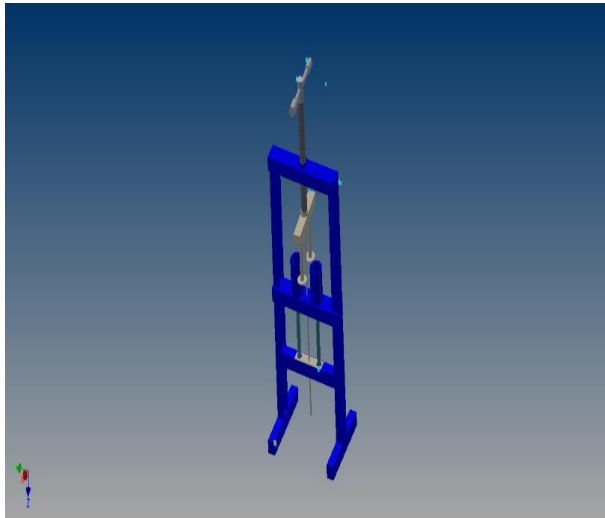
3-D view of the briquetting machine Plate 2: Picture of Machine
